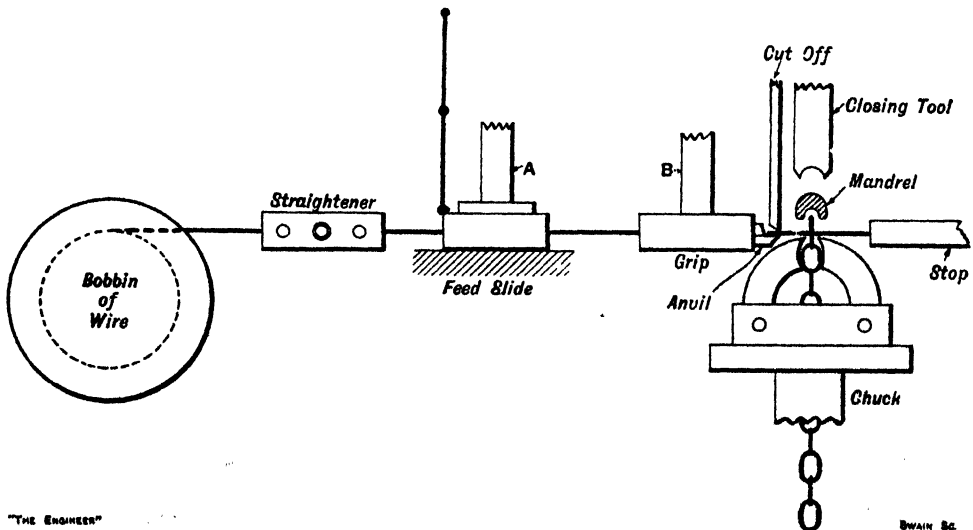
DIAGRAM OF TRACE CHAIN MAKING MACHINE MECHANISM.
